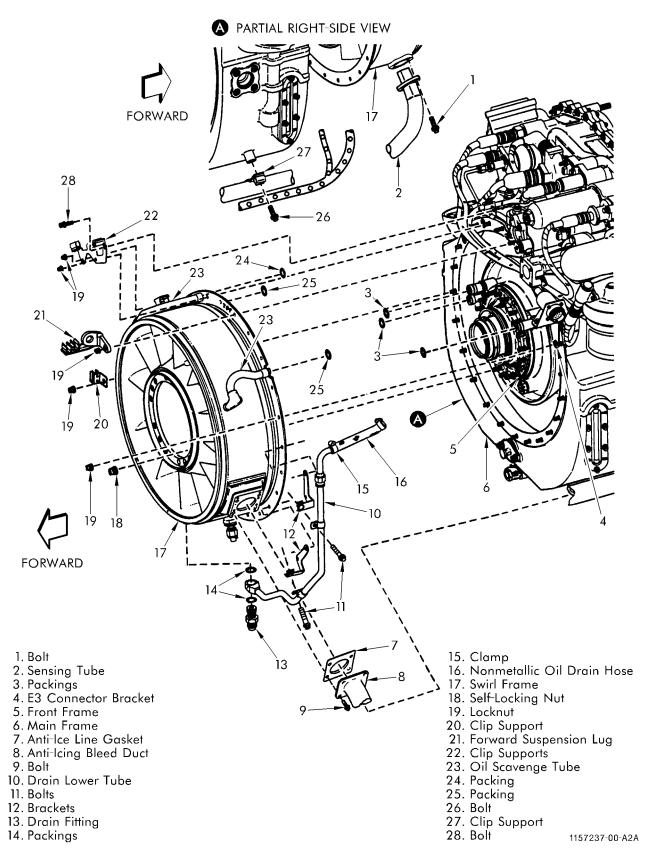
(T701C, T701D) Swirl Frame; Removal and Installation
